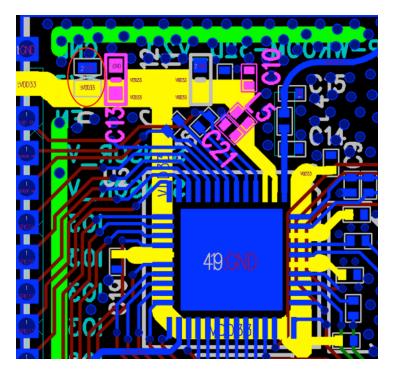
ESP32 Power Traces in a Four-Layer PCB Design
